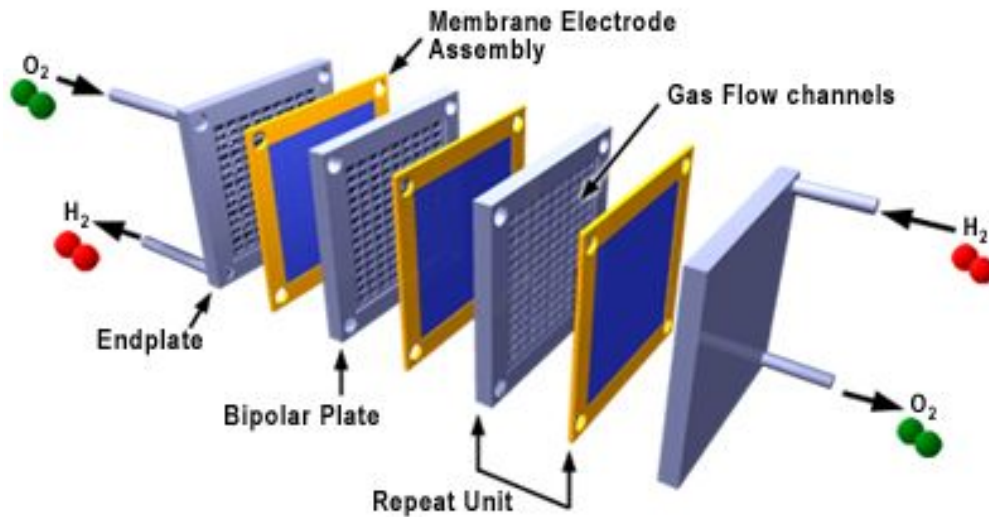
Single PEM fuel cell components and assembly [1].
